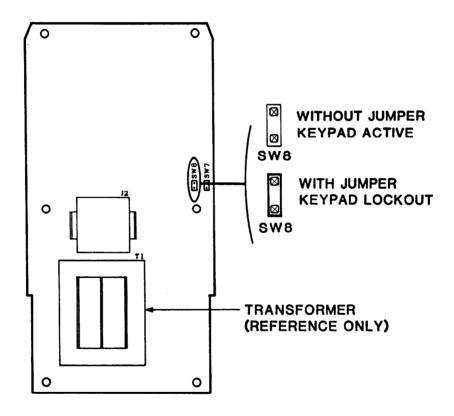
Supervisor Lockout Shunt Jumper Installation
